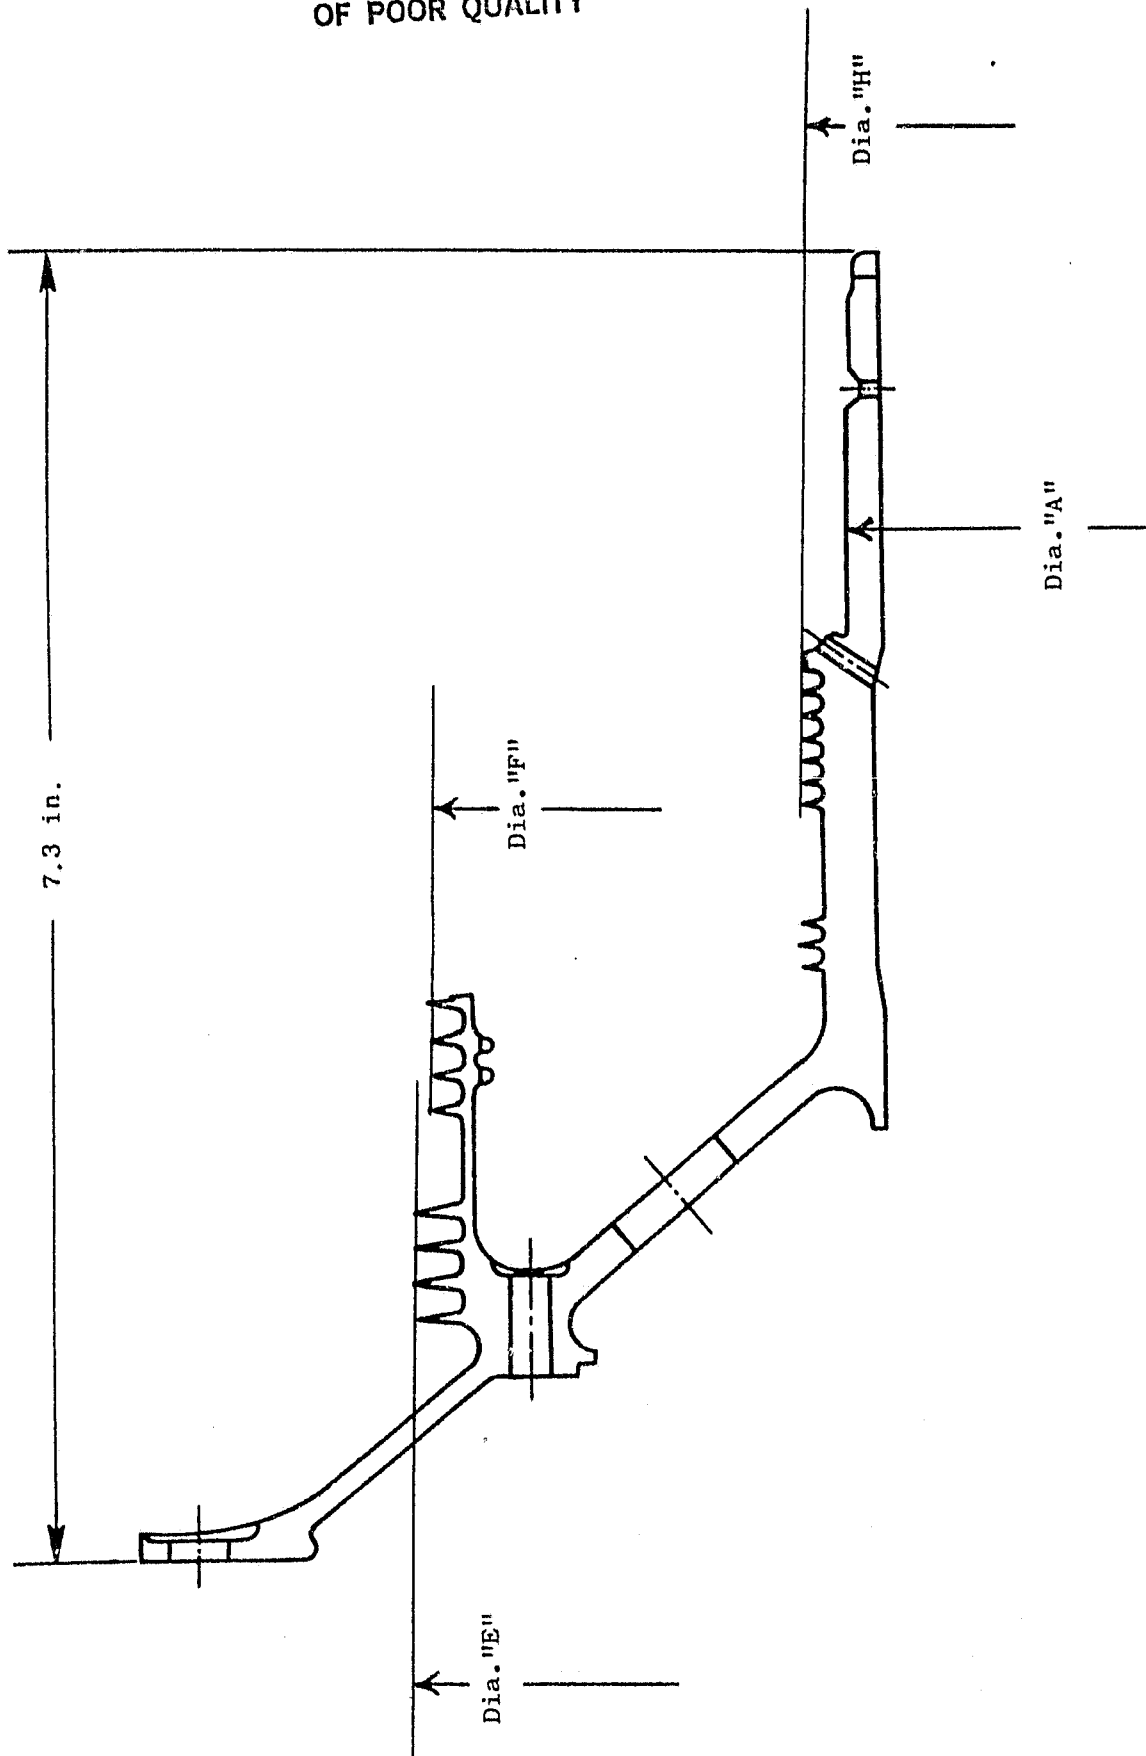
CF6-50 HPTR Shaft Dimensional Location.
